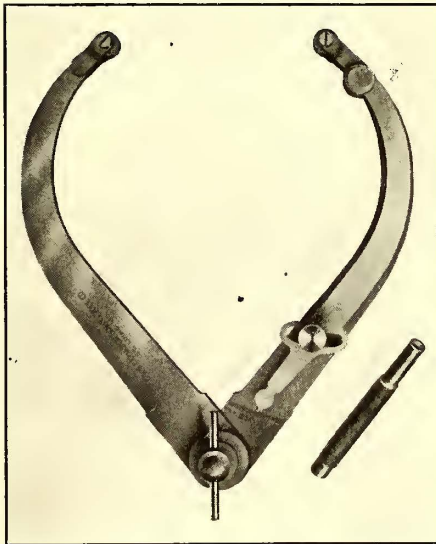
Micrometer Caliper to Adjust Tool for Boring Wheels
